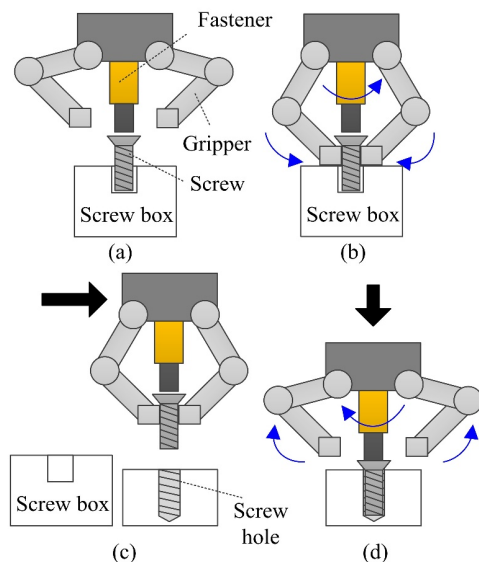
Screw fastening process: (a) positioning, (b) grasping, (c) hole finding, and (d) fastening.
